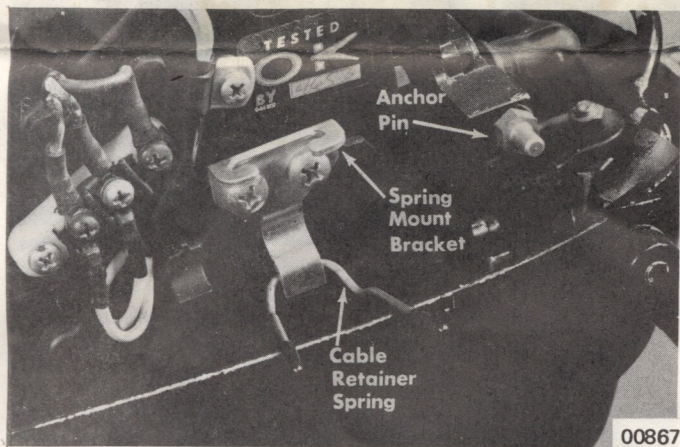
Installing Mount Bracket and Cable Retainer Spring
